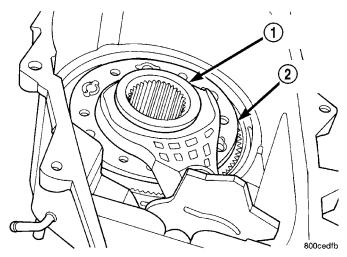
Install Range Fork And Hub Assembly 1 - RANGE HUB
